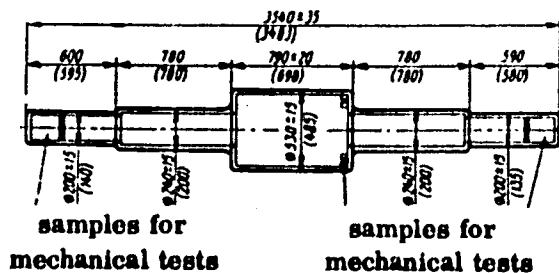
Sketch of rotor forging (snagging contour) indicating the sites from which samples were taken.
